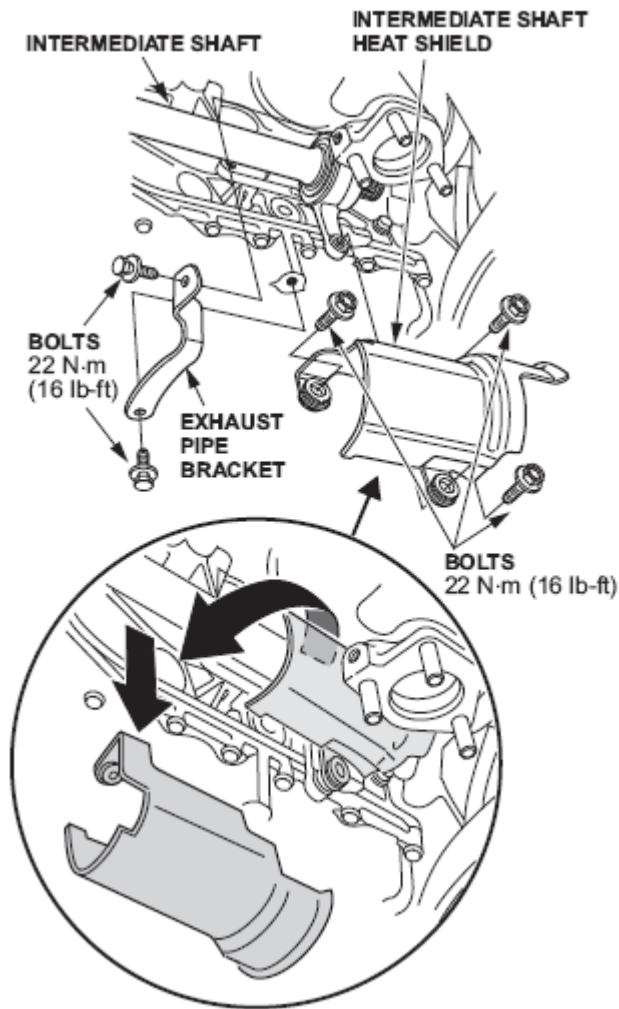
Identifying Exhaust Pipe Bracket Bolts & Torque Specifications
